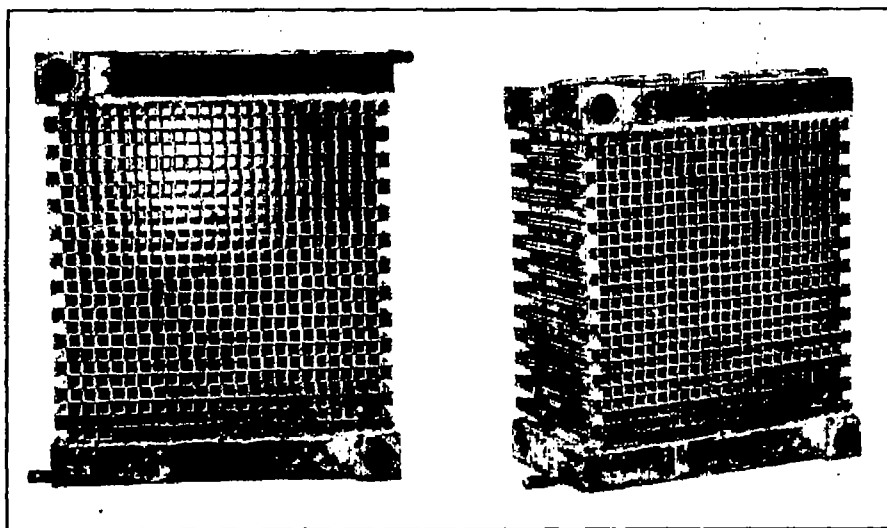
The Livingston Radiator & Manufacturing Co. $\frac{1}{4}$ -inch square tubes. Core 4 inches deep.
